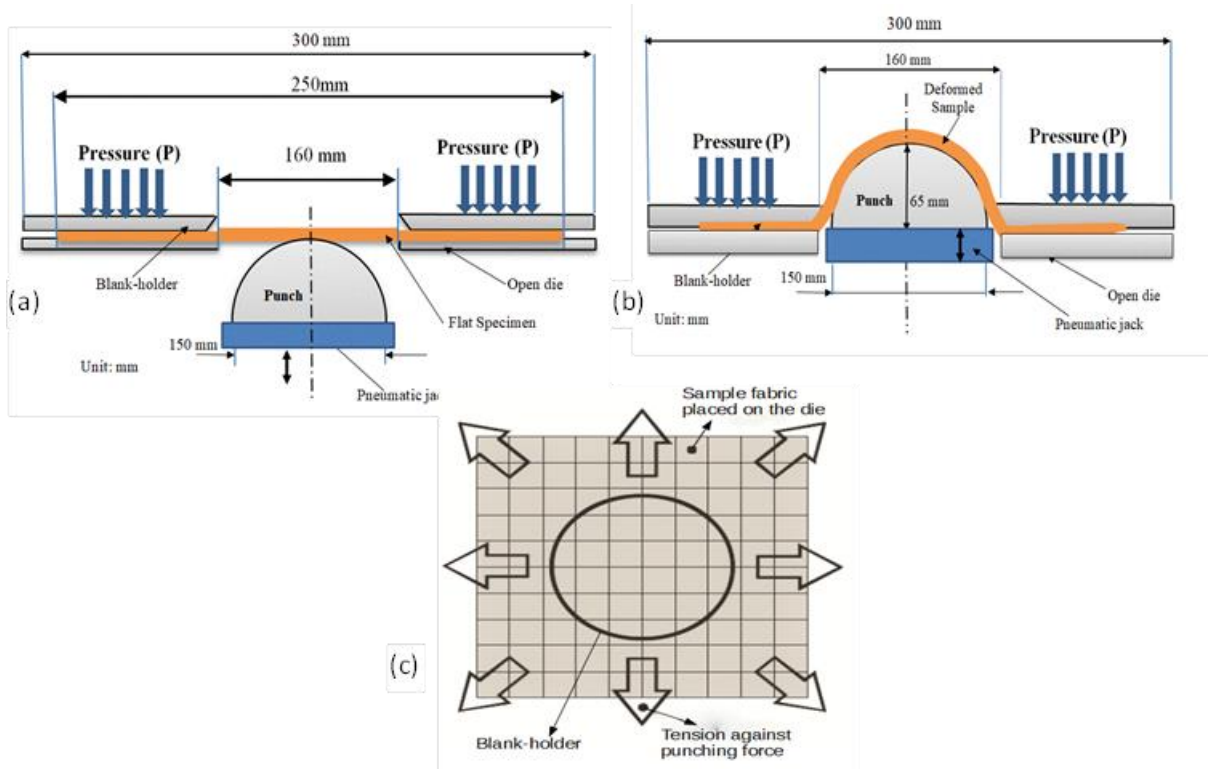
Formability process of the sample with its hemispherical deep drawing tool geometry and specimen position (a) and (b) side view before and after forming process respectively, and (c) top view
